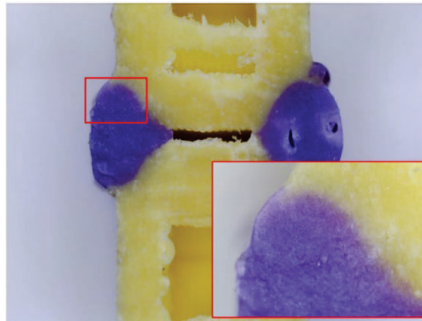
Cross-section of the welded v-notch sample for Charpy
